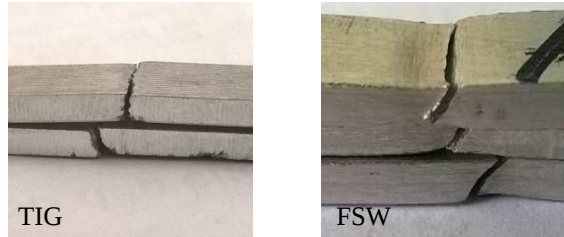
Cross sections and the tensile fractured locations in TIG welding and FSWs
